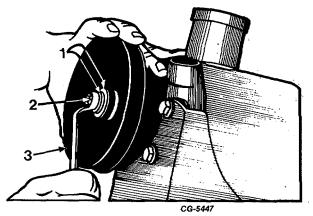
Pulling Power Steering Pulley Against Shoulder of Pump
